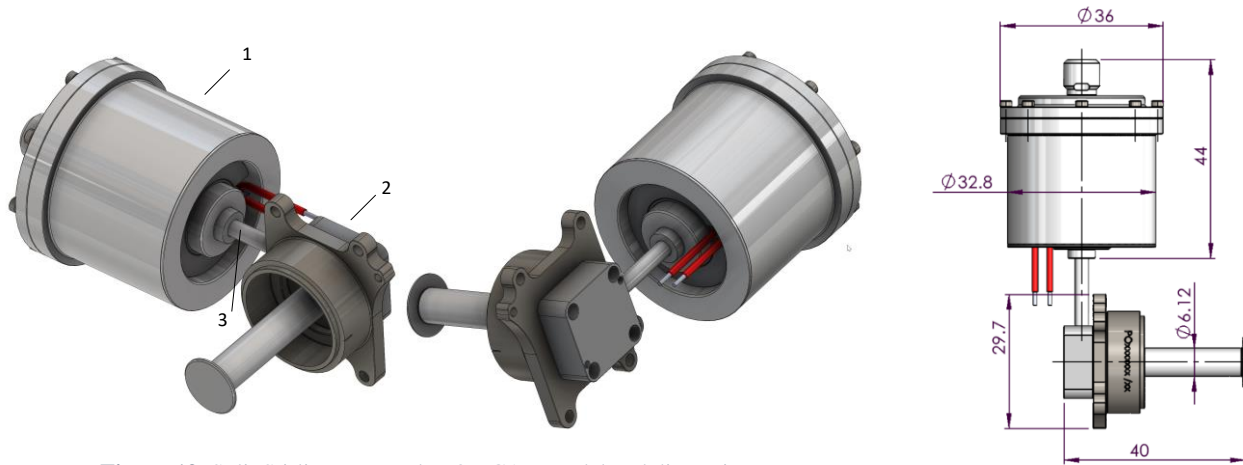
Split Stirling cryocooler, 3D CAD model and dimensions
